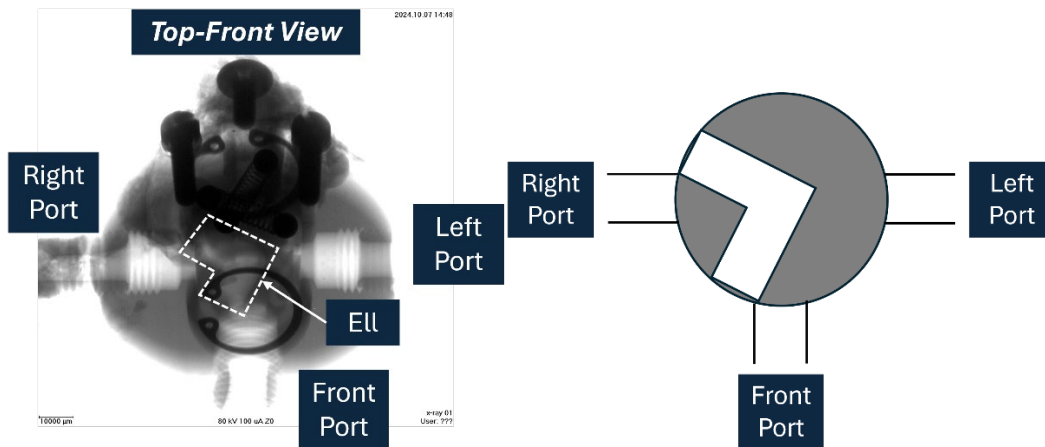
Top-Front View of Fuel Selector (left) with Schematic Drawing (right)
